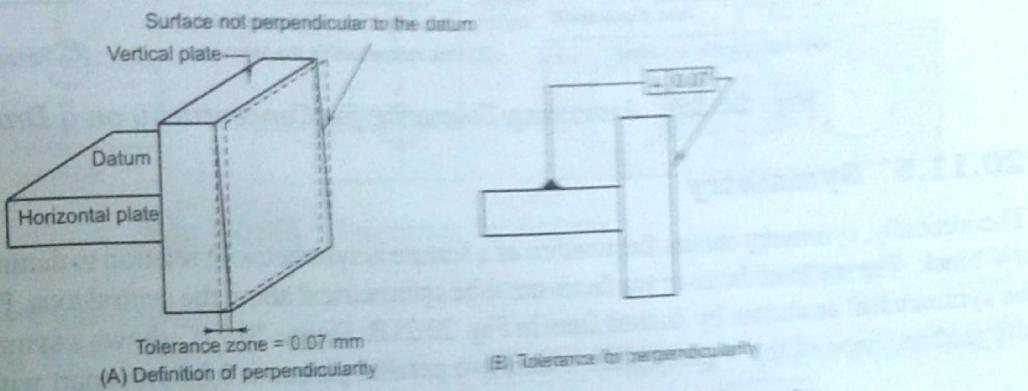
Indicating Perpendicularity of a Surface on Drawing
